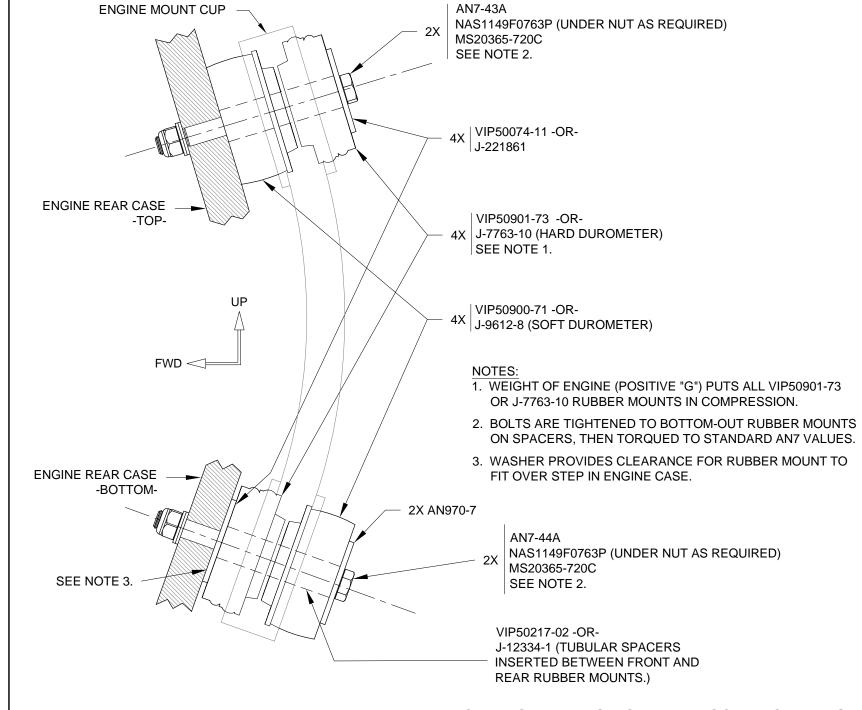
TYPICAL INSTALLATION OF DYNAFOCAL MOUNTING KIT
